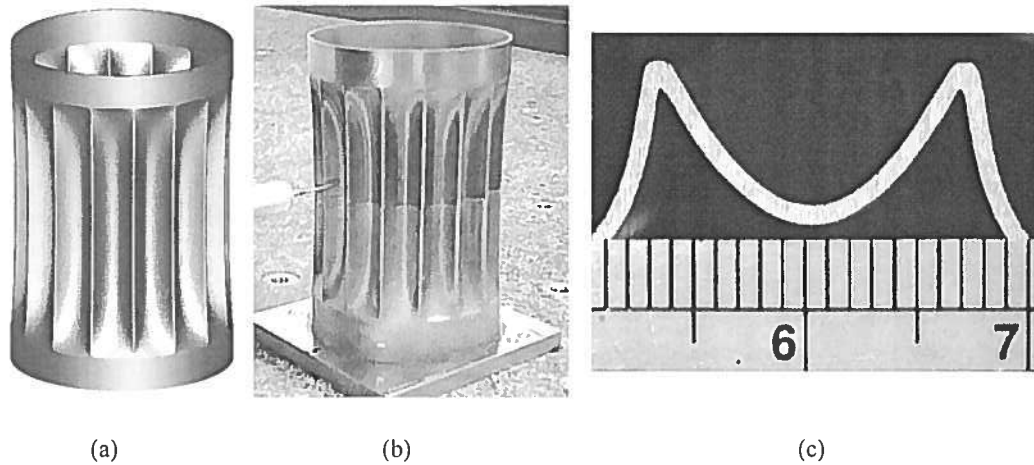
FSP shell of one design, (a) CAD drawing, (b) LC IN-625 shell, and (c) magnified cross-sectional view of crests on the half shell.
